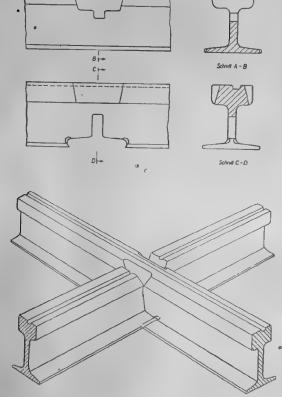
Welding preparations at a junction of heavy web rails
